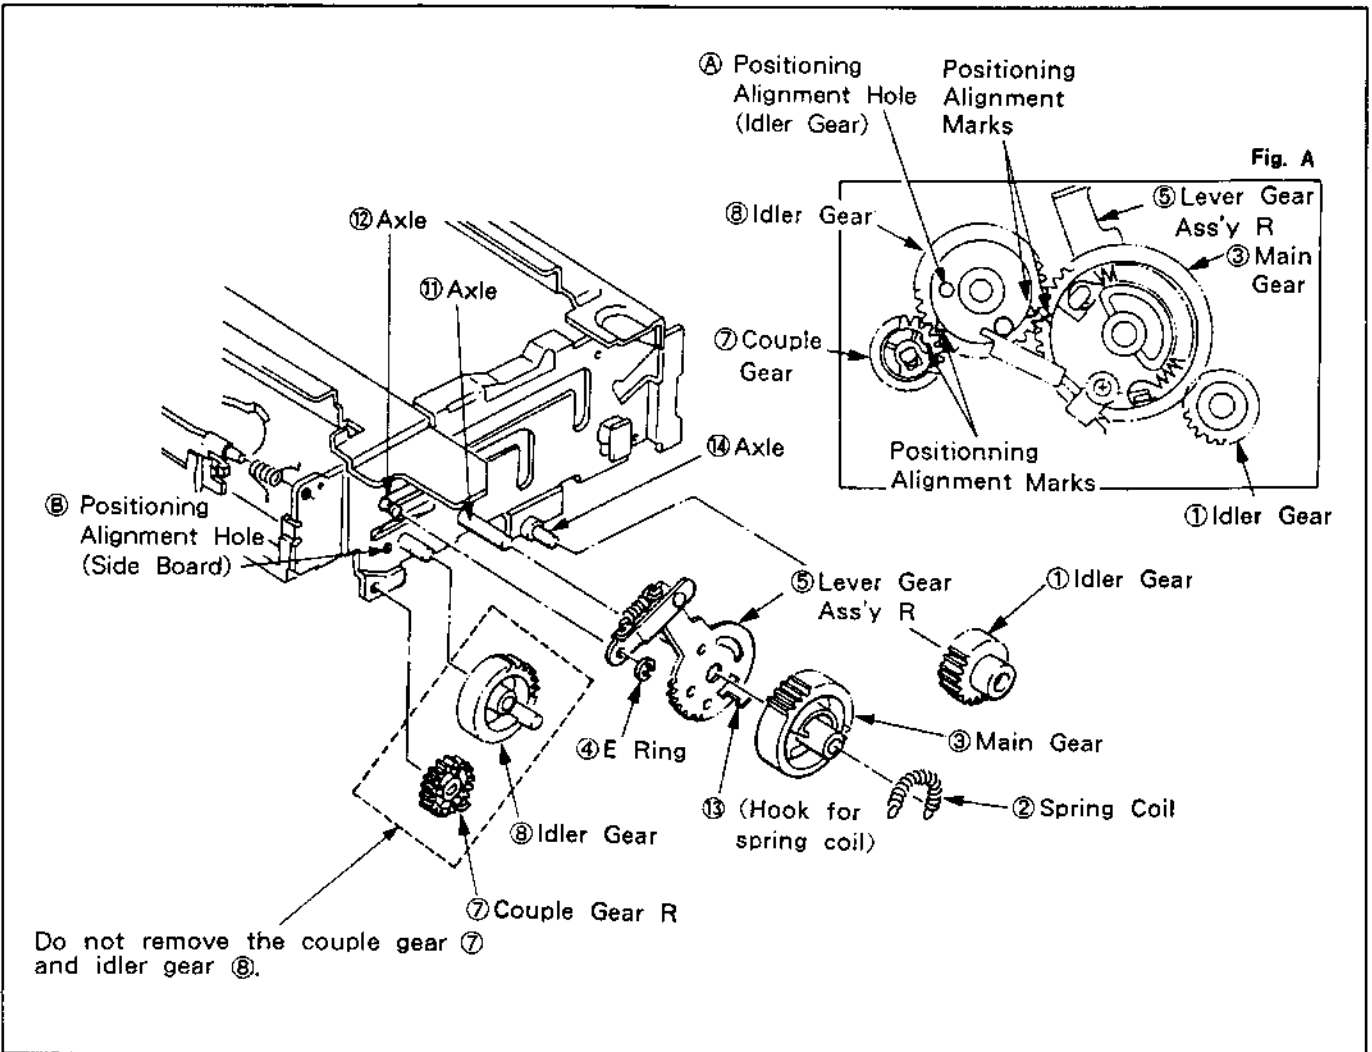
Cassette Drive Gears (Right Side)
